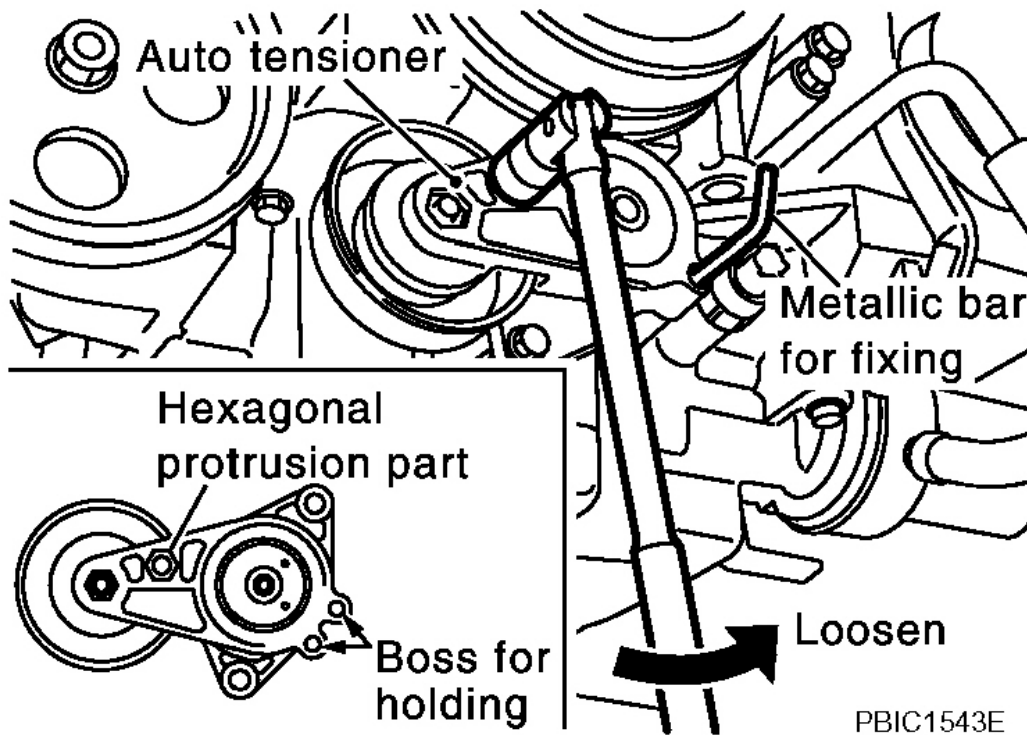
Loosening Auto Tensioner By Using Box Wrench
